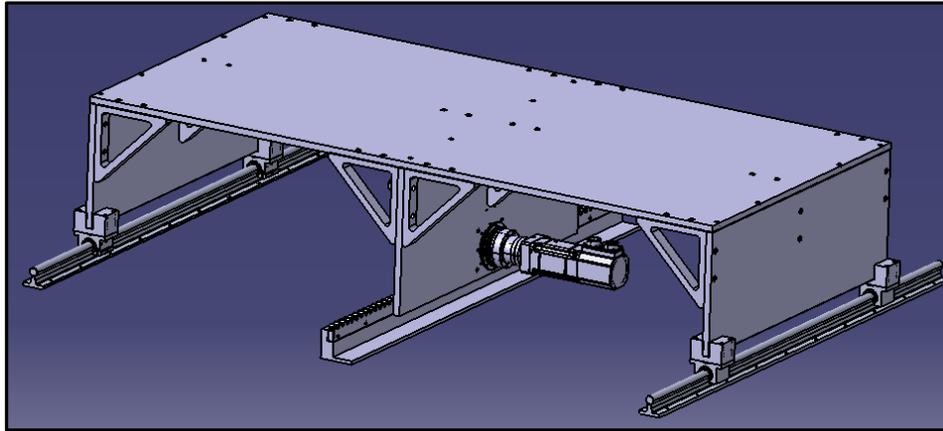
Isometric View of the Base Structure with the Emerson NTE-212-CONS-0000 Servo Motor and an APEX Gear Reducer on the Winding Carriage
